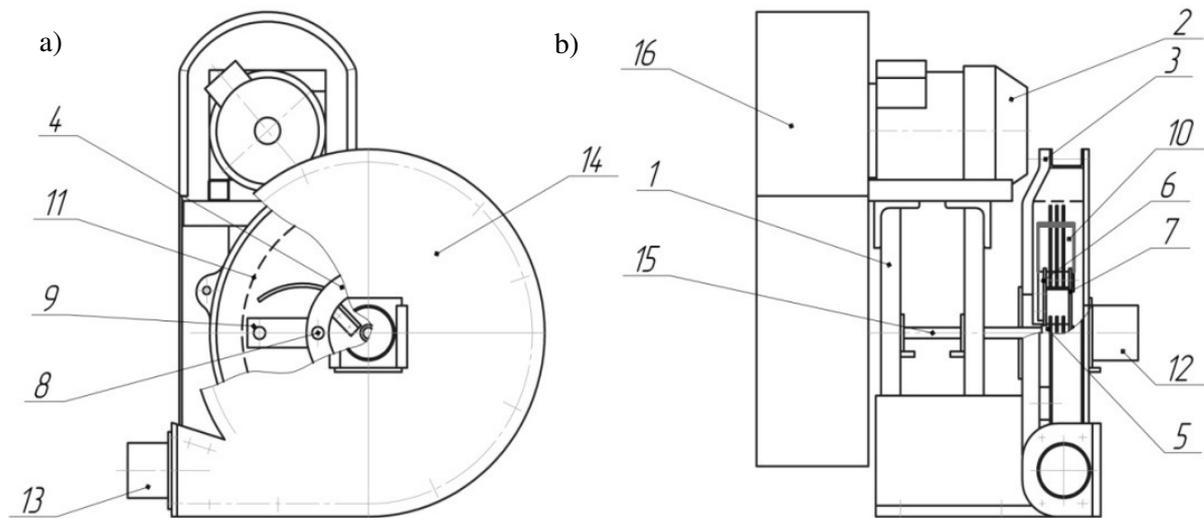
Structural embodiment of the experimental hammer crusher with a rotor fan: a – general view; b – lateral view; 1 – frame; 2 – electric motor; 3 – body; 4 – rotor fan; 5 – hub; 6, 7 – respective internal and external disks; 8 – axis of the suspension; 9 – set of hammers; 10 – blades of the fan; 11 – sieve; 12 – suction connection (inlet duct); 13 – discharge connection (duct); 14 – cover; 15 – shaft; 16 – casing
